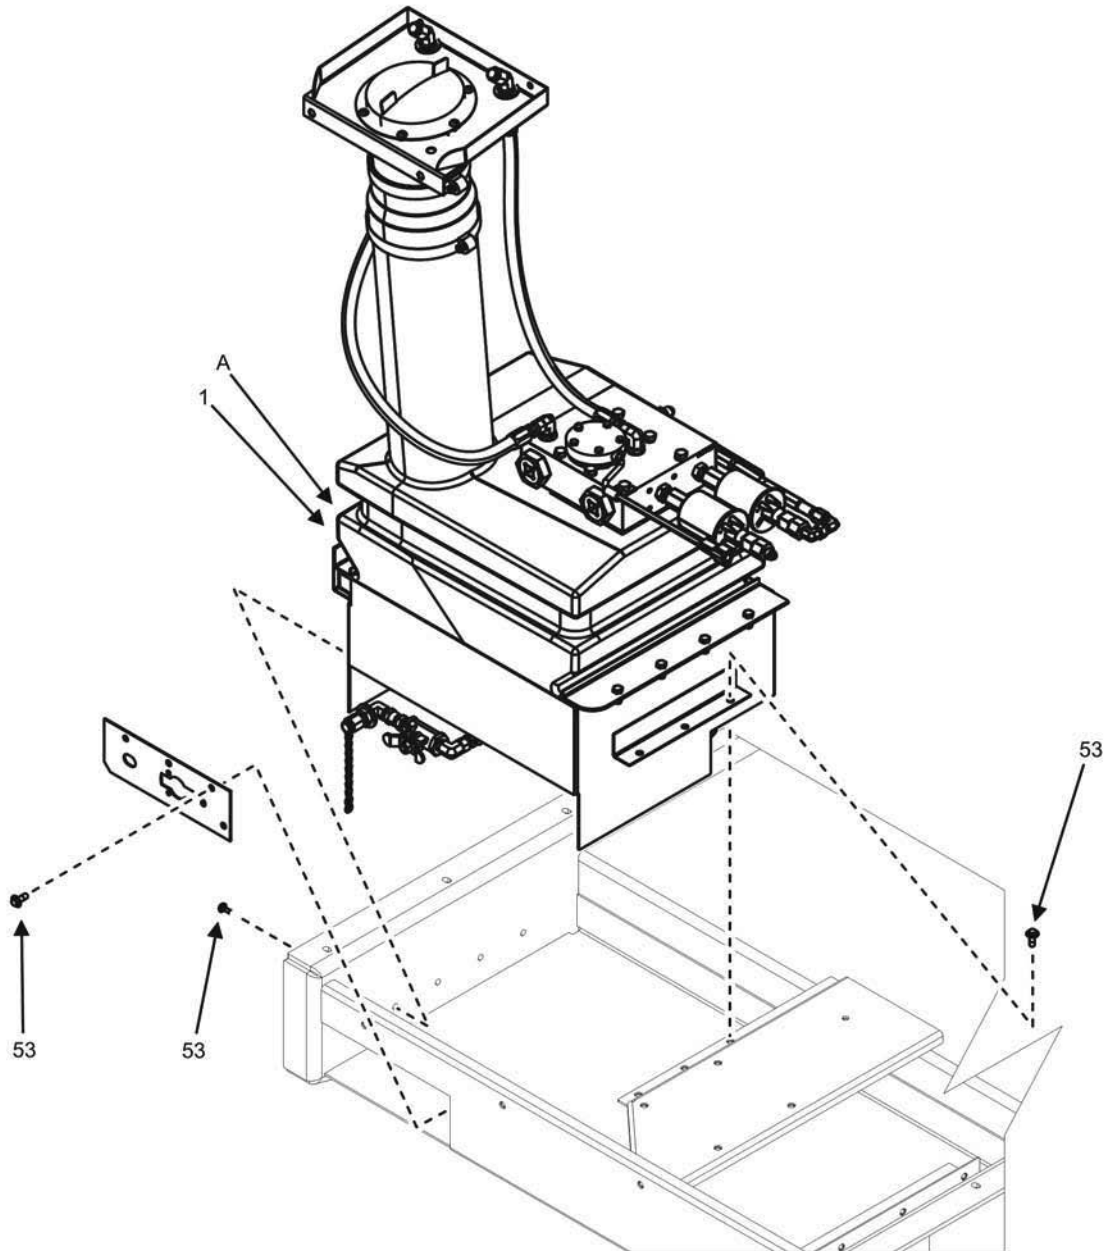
Fuel System Assembly (Sheet 1 of 6).
